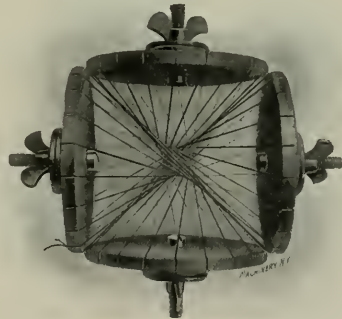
Model illustrating Two Skew Bevel Gear Pitch Surfaces in Contact.
